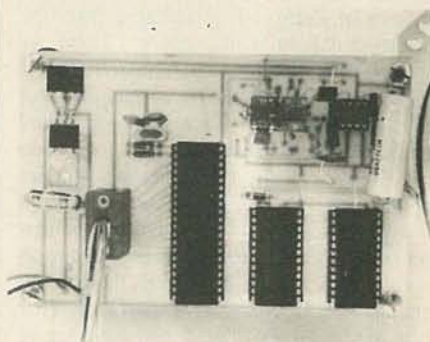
PROTOTYPE OF the speech synthesizer. DIP header at top of board is not used in version described here.
